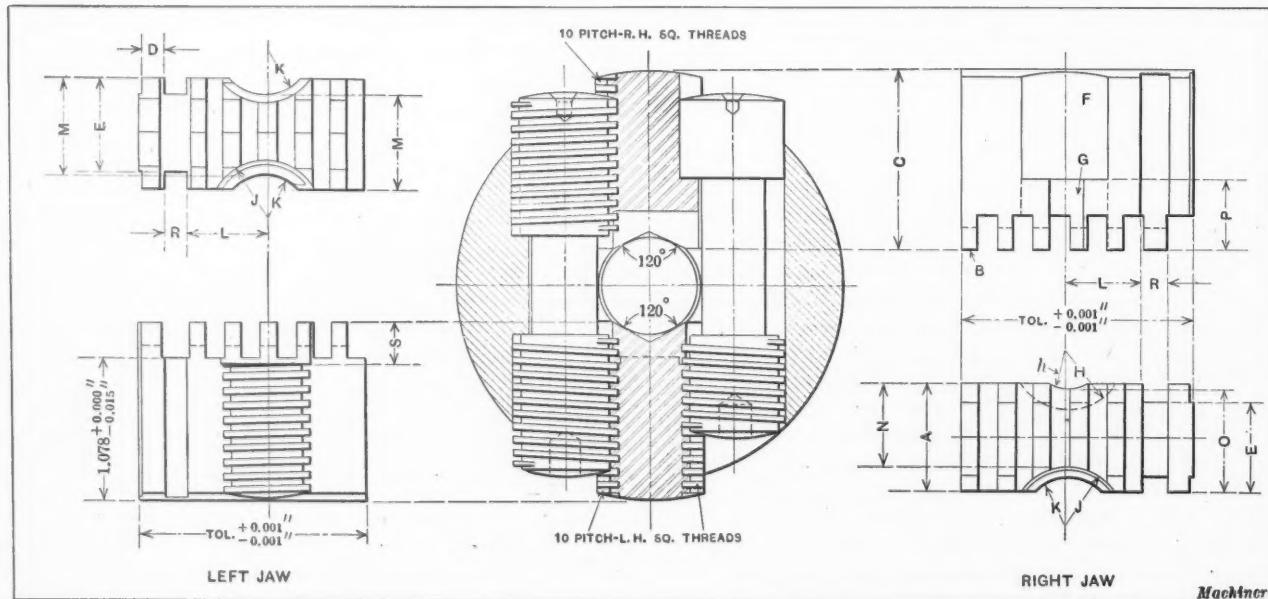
Assembled Chuck, showing Relation of Parts, and Views of the Left- and Right-hand Jaws
